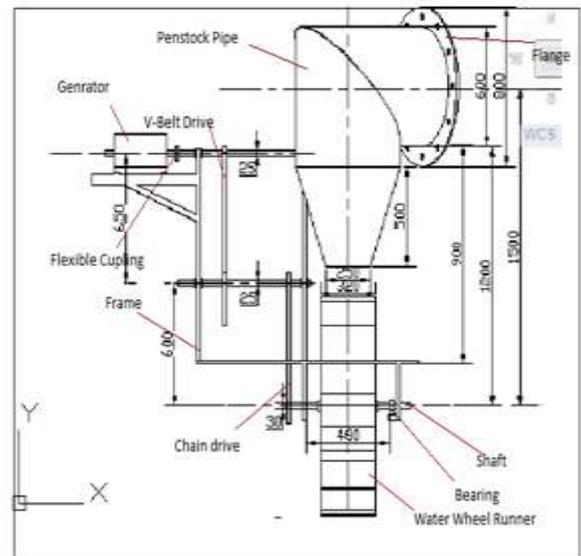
General layout of a hydro-electric open type low head water wheel turbine.
